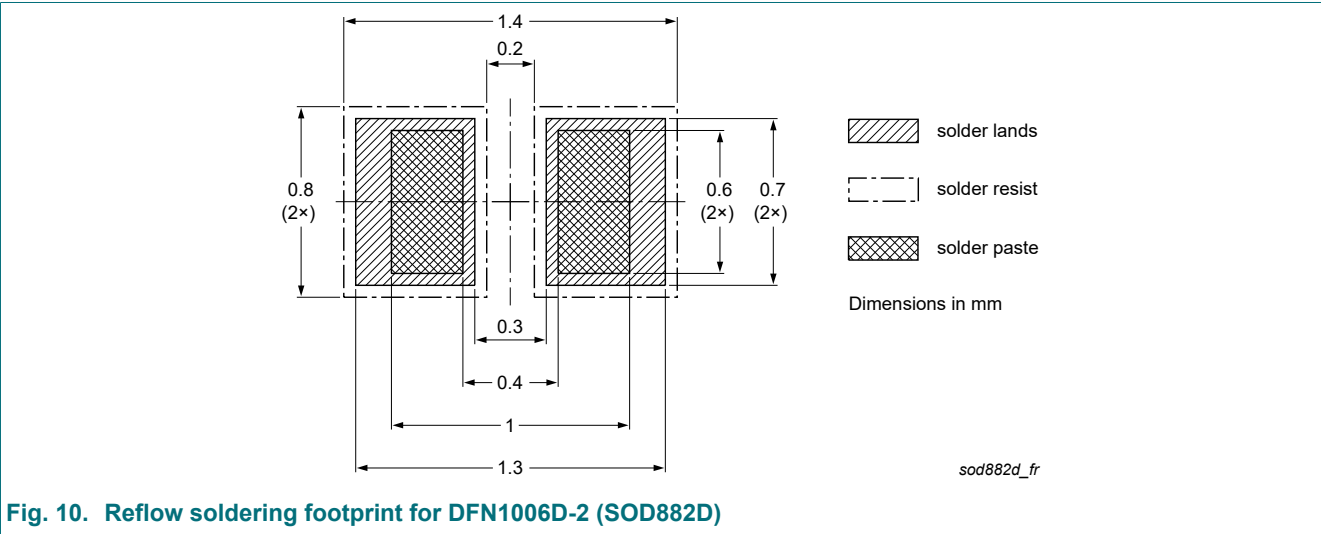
Reflow soldering footprint for DFN1006D-2 (SOD882D)
